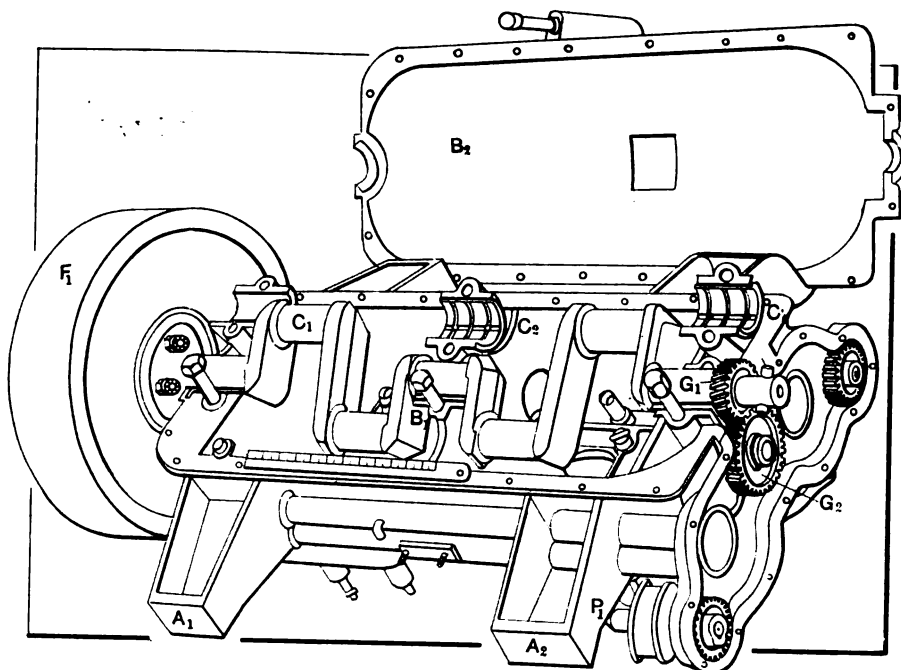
Looking into the crankcase of the "40" model, with the lower half of the case removed, illustrating crankshaft construction and bearings
